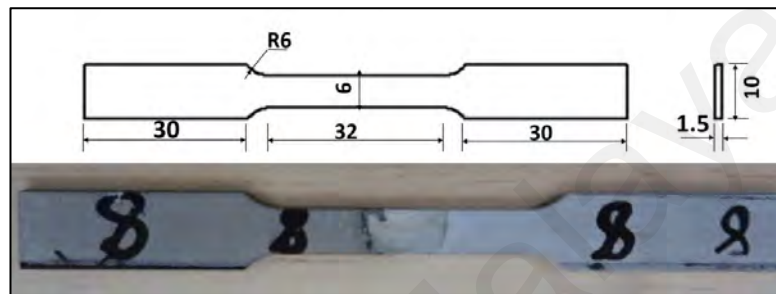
Tensile test standard dimensions and wire EDM cut sample
